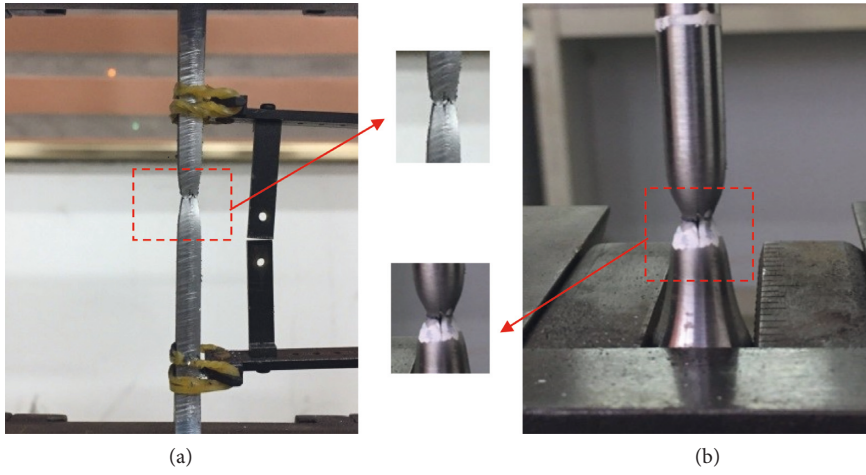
Failure mode I of specimens without welded joint. (a) Sheet material specimen. (b) Rod-shaped specimen.
